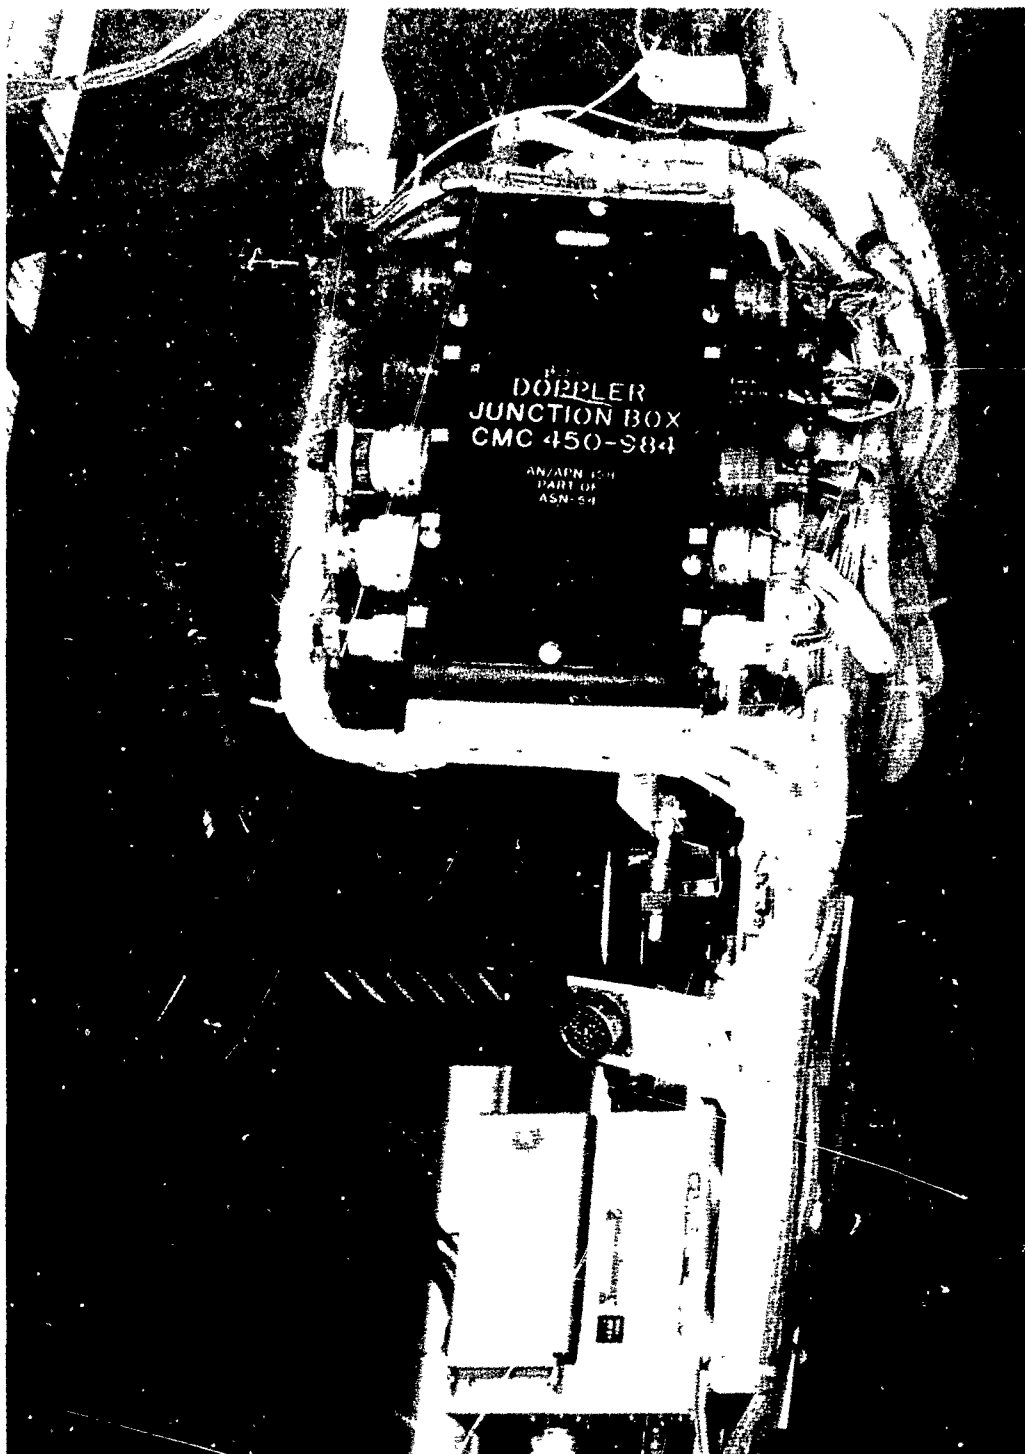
Pod 2 Aft Beam Wiring (View Right Side).
